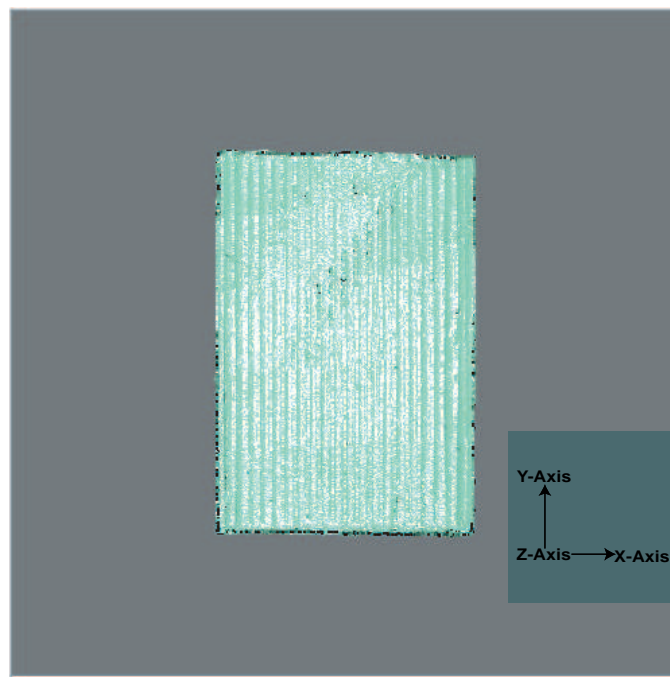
Machined part of example 1 with tolerance 0.01 inches
